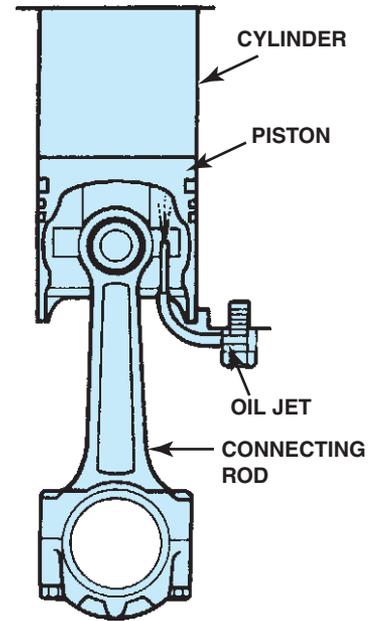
Oil jets are often used in some turbocharged, and many diesel, engines to cool the pistons.
